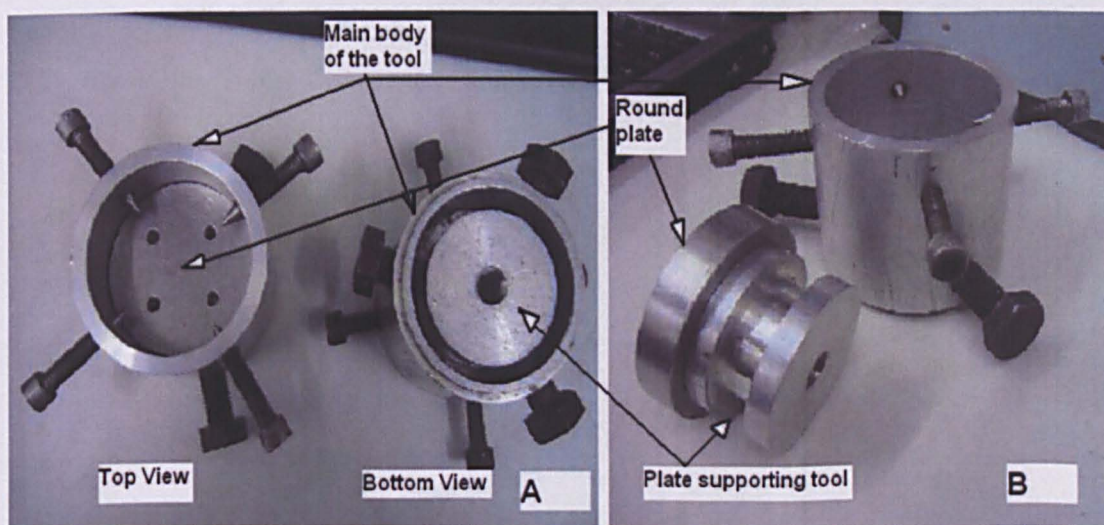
Photographs of the specially designed and developed spinal vertebrae holding mechanical tool (A) Top and bottom view of the tool (B) Three parts of the tool-(1) main holding body with positioning and locking screws (2) simple round plate (3) Plate supporting tool
